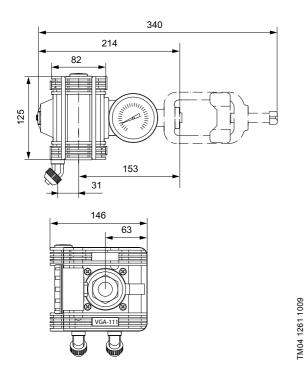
VGA-111 with manometer on the right side and short inlet valve
